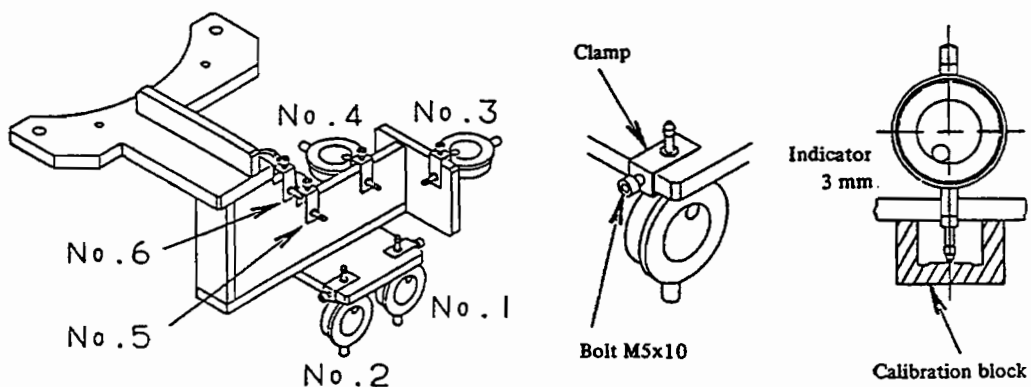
(c) Mounting dial indicators (S-10)
